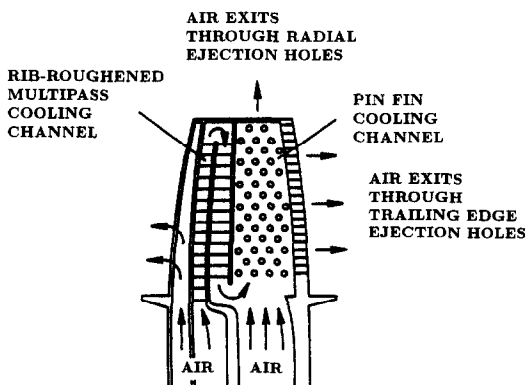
Cutaway view of a modern internally cooled gas turbine blade.
